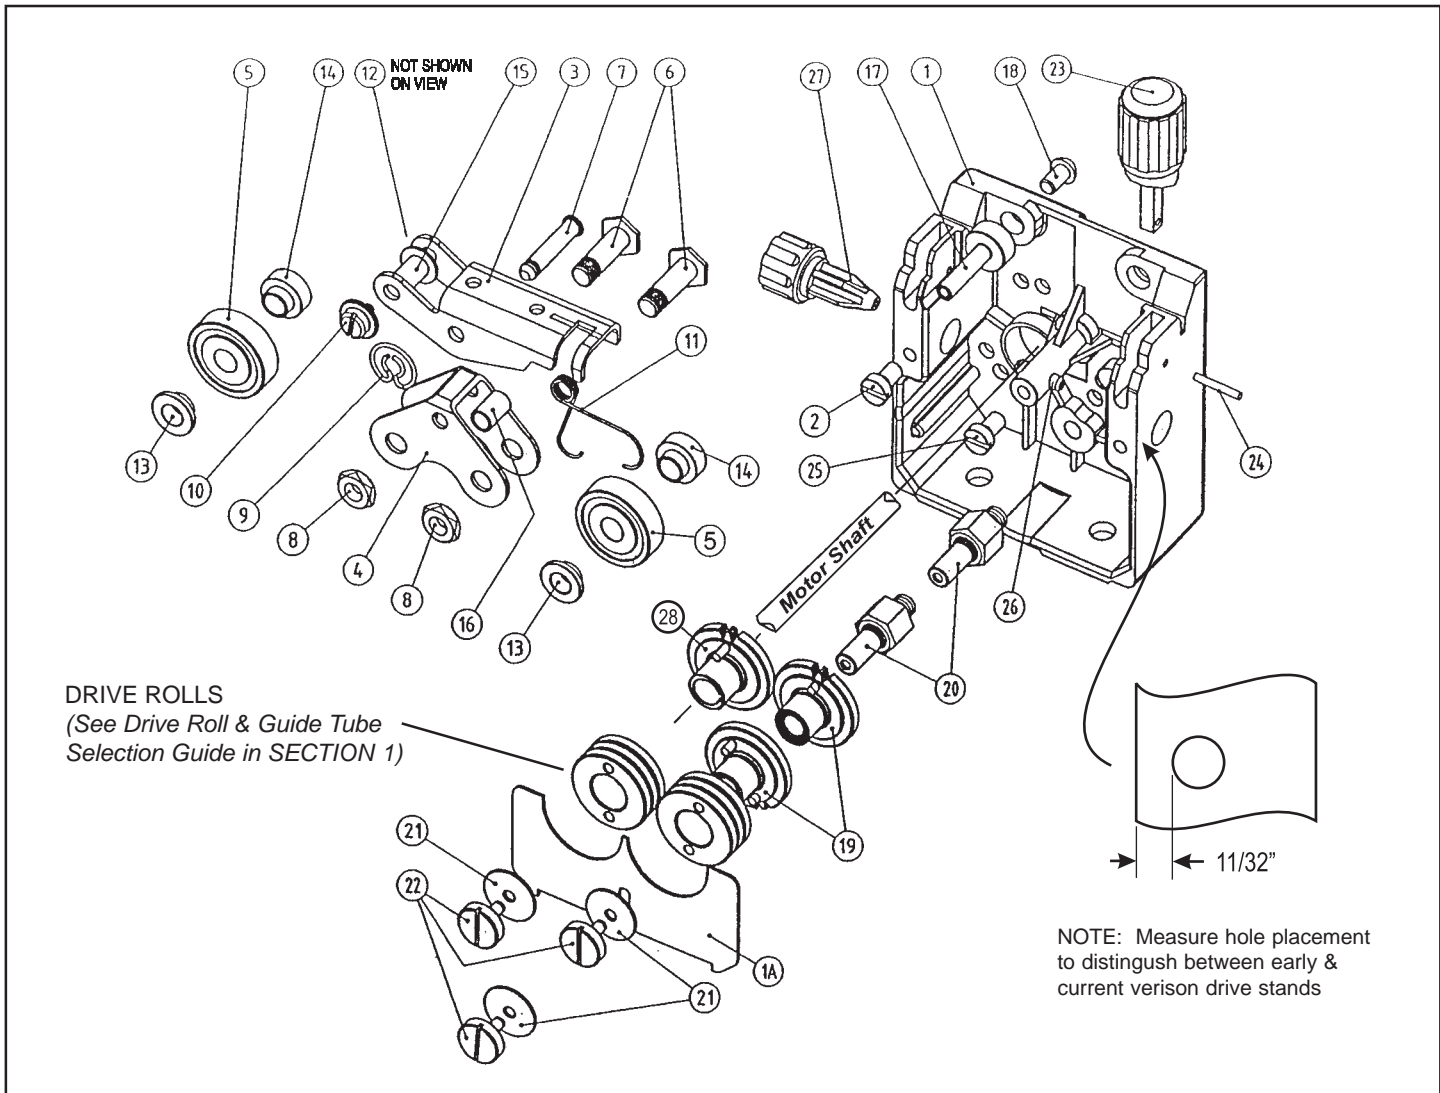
Auto-Lift Mini Four Roll Geared Wire Drive System - 0558001339
